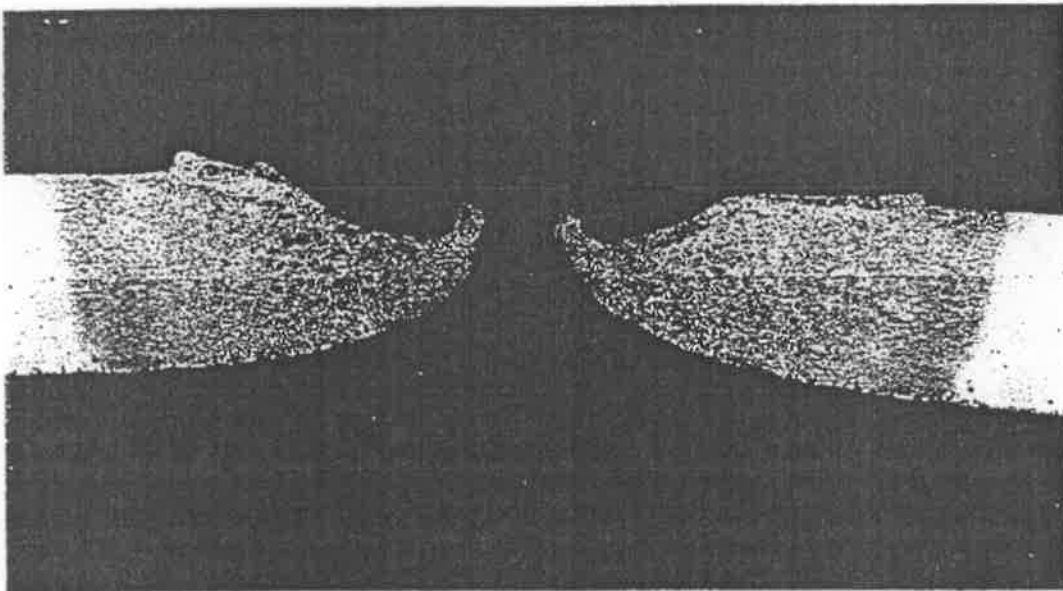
Example of burnthrough: 2.4mm diameter electrode, 80A, 21V, 1.9mm/s welding speed, 0.88kJ/mm heat input.
